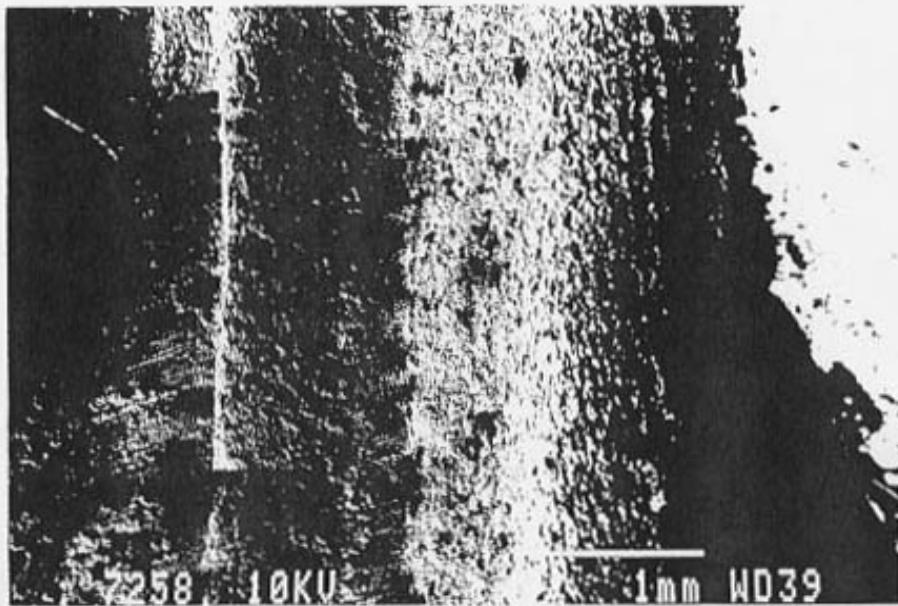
Flame cut and machined surface of bore hole surface of lug A2
